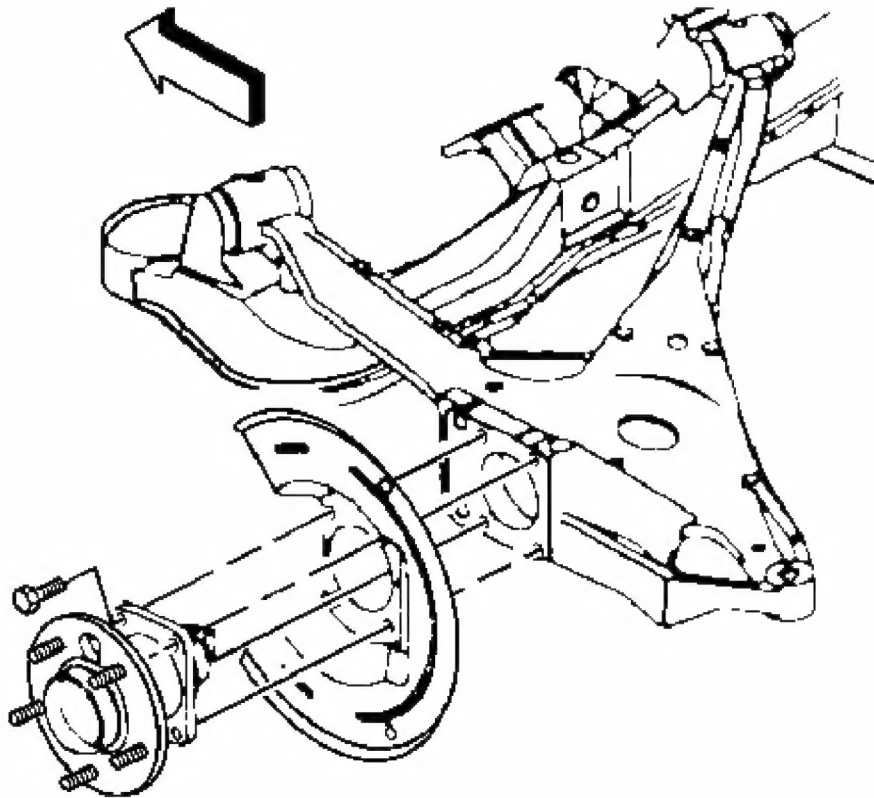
Removing/Installing Rear Wheel Bearing/Hub Assembly
